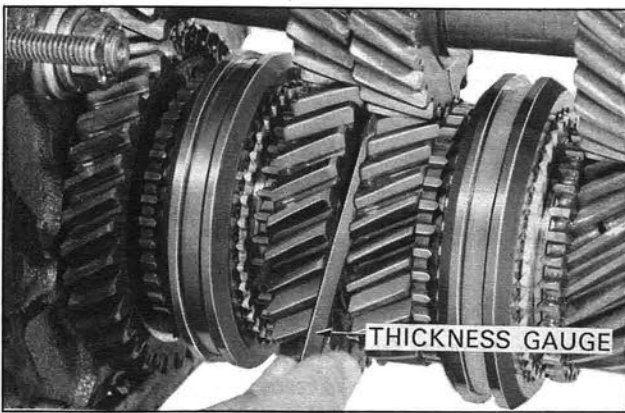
Measuring end play between 2nd and 3rd gears
